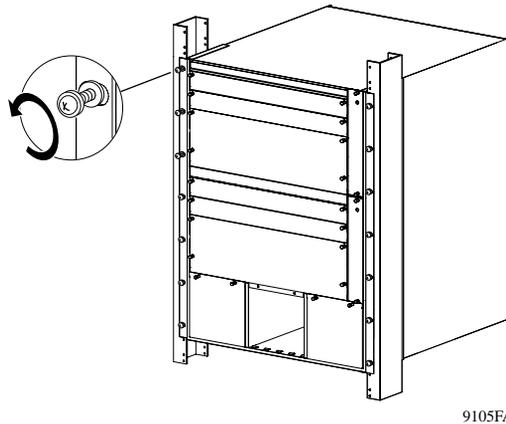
Loosening the rack-mounting screws: 8006 Chassis
